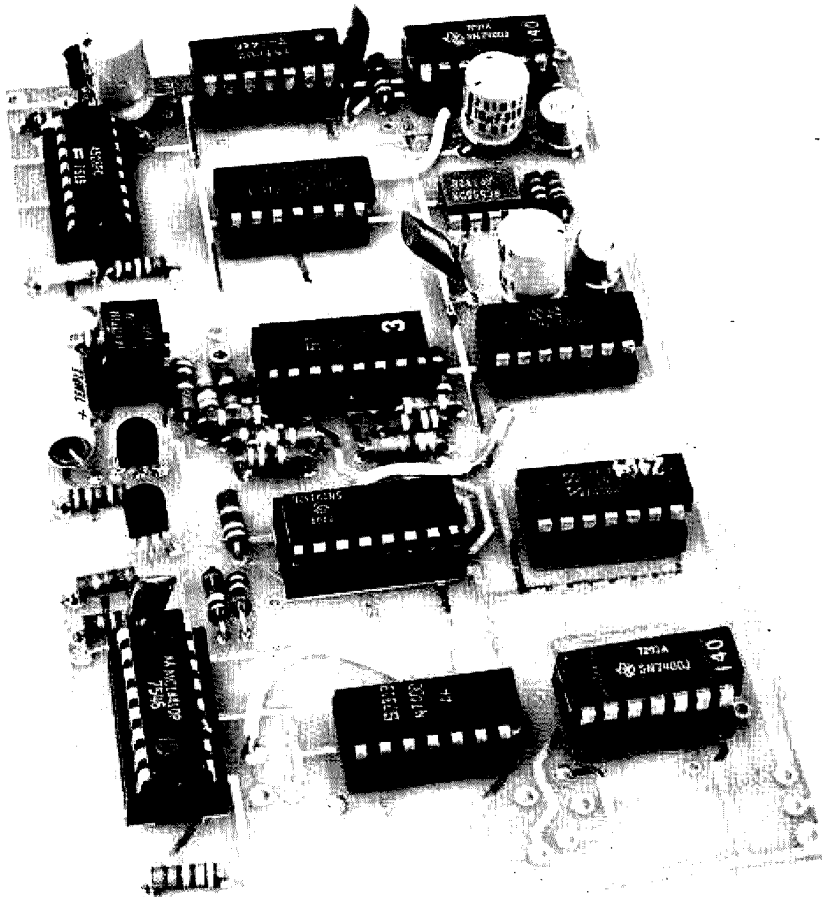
Photo A. This is a photograph of the completed autodialer printed wiring board. The memory (center) should always be in a socket.
